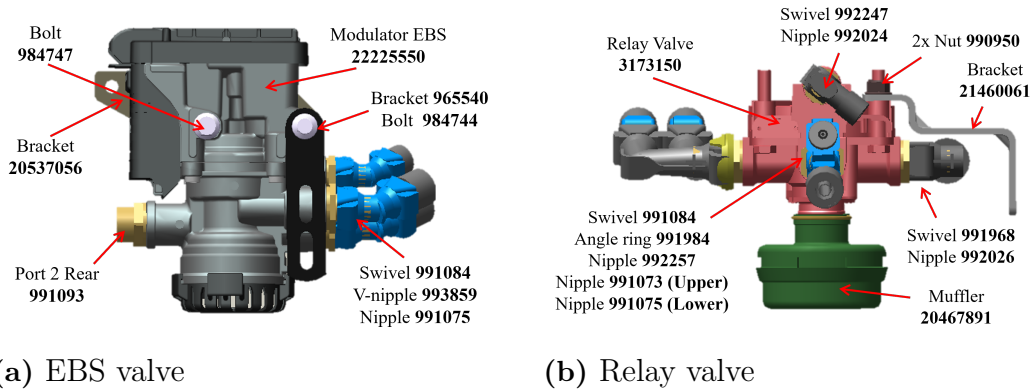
Example configurations of two valve types assembled at the valve assembly, and their included components.
